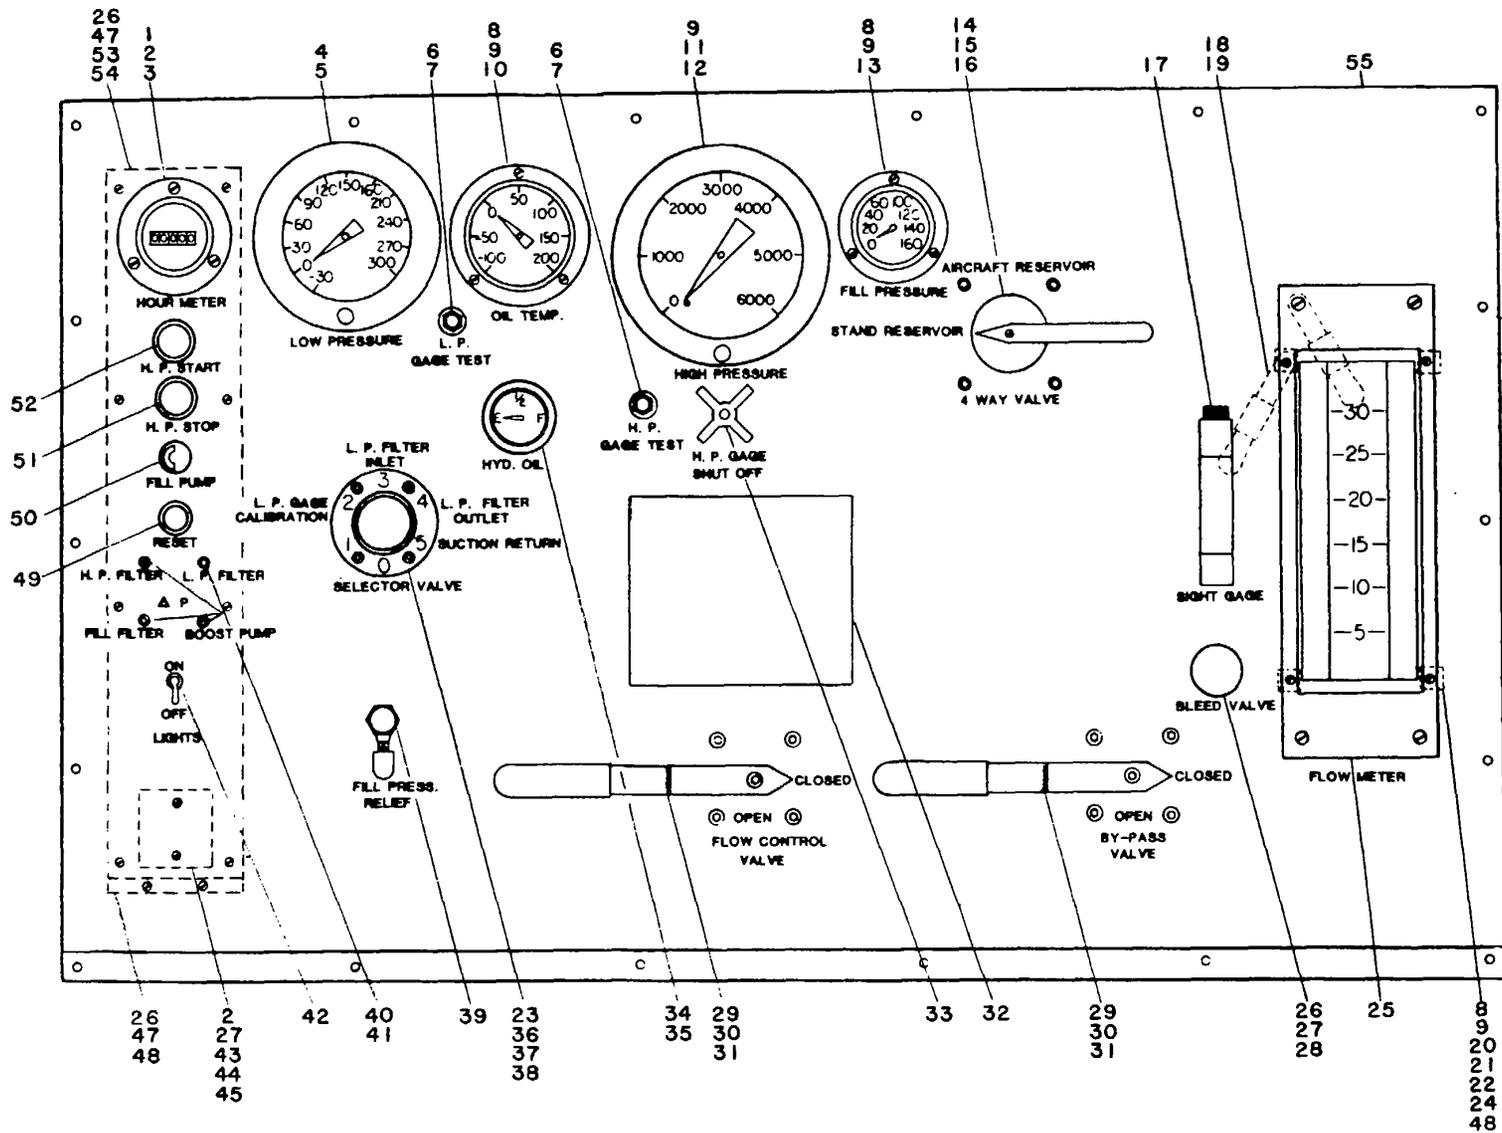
INSTRUMENT PANEL ASSEMBLY
